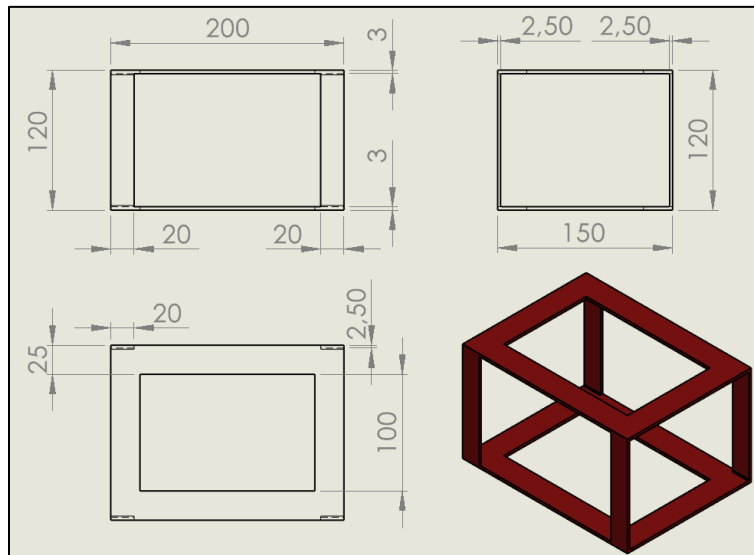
18: Technical drawing of the hollow rectangular prism artificial reef object (in millimeters)
